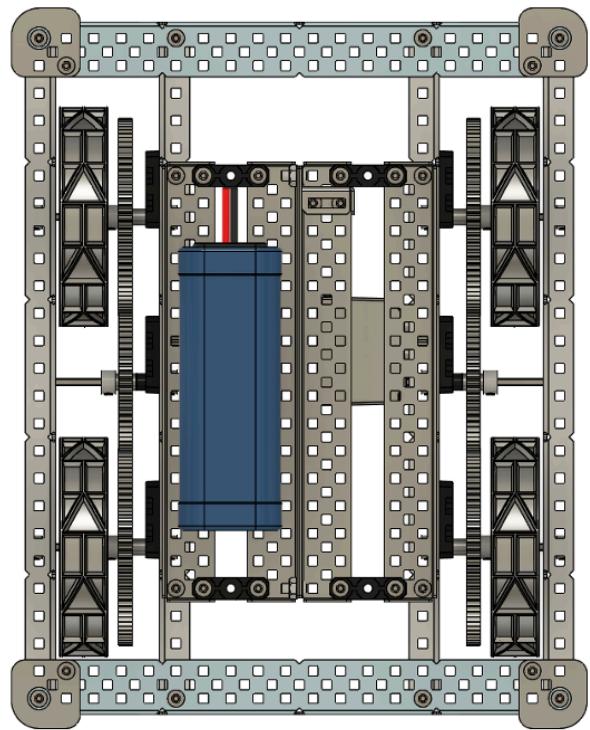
Top View of the Robot for Benchmark B in Fusion 360
